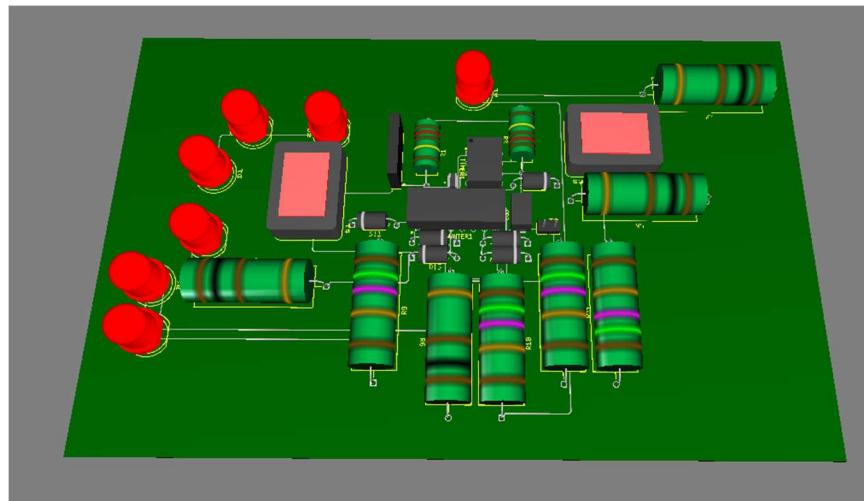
3D rendered view of the completed PCB design illustrating component placement, through-hole packaging (DIP ICs, resistors, LEDs), and overall mechanical arrangement before fabrication. (with HDR1X2 for Vcc and GND)
